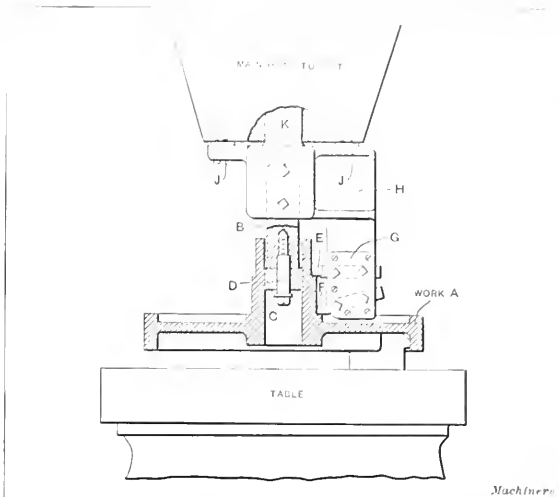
Multiple Turning Tool for Vertical Turret Lathe
